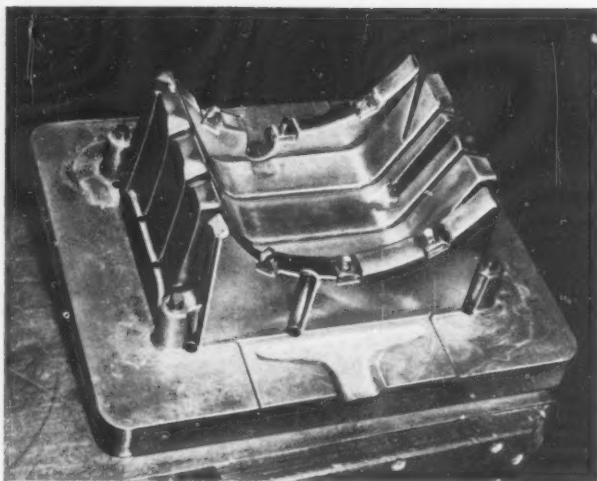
Views of Base Support Castings for the Crankcase in Fig. 6, Showing the Thin Ribs on the Under-side and the Method of Gating. Ejector Pins Act on the Lower Surface of the Flanged Edge
